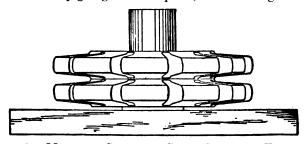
MILLING CUTTERS, GEAR CUTTERS, ETC., ON WOODEN PEGS
